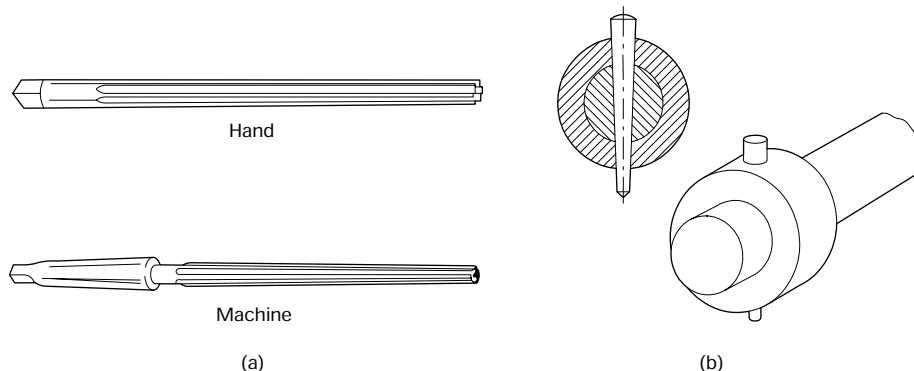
Taper pin reamers and their use: (a) taper pin reamers; (b) a collar secured to a shaft by means of a taper pin
